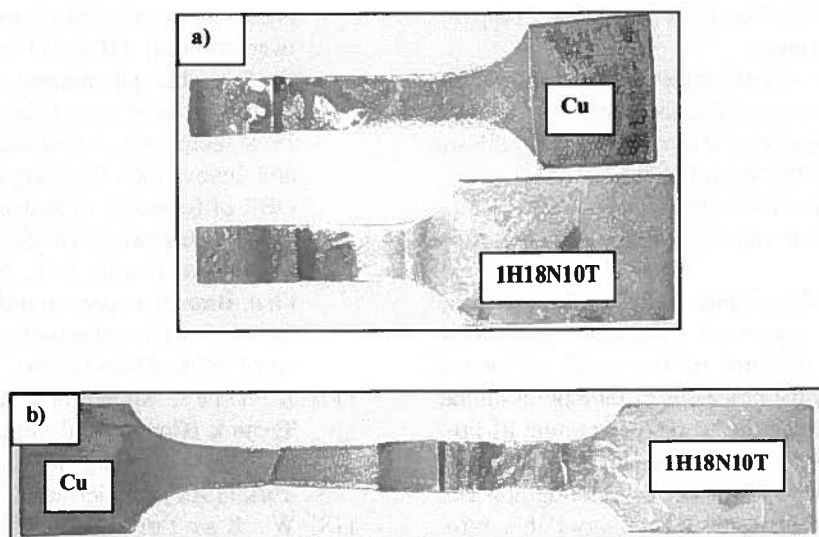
Exemplary fractures in Cu -1H18N10T brazed joints, a – shearing in overlap (sample No. 1), b – break in copper (sample No. 3)
